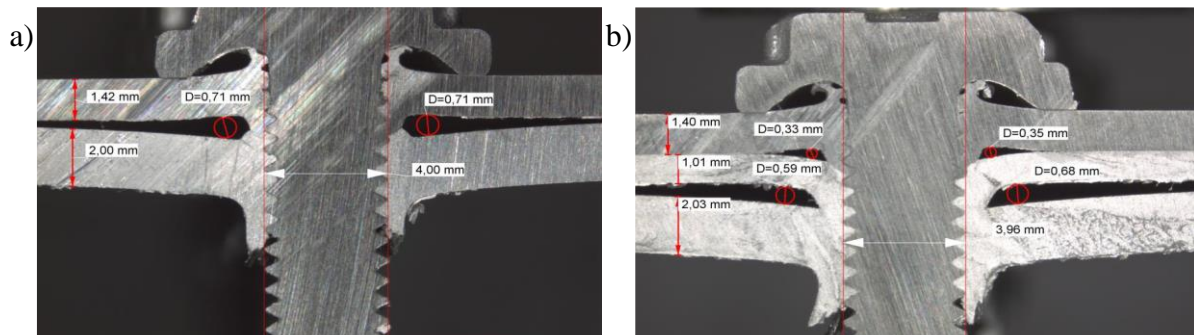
Cross section of a joint of 2 sheet 1.4mm DP600GA – 2mm AA6061 (a) and 1.4mm DP600GA – 1mm AA6061 – 2mm AA6061(b)
